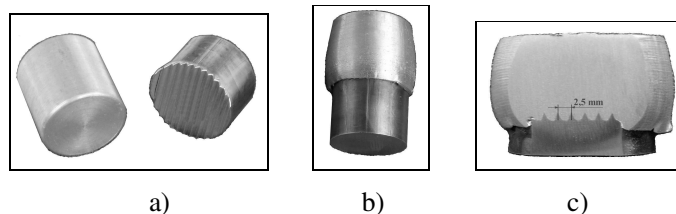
Specimens' components: a) before up-setting; b) welded specimen; c) the brass cogs imprint the aluminium
